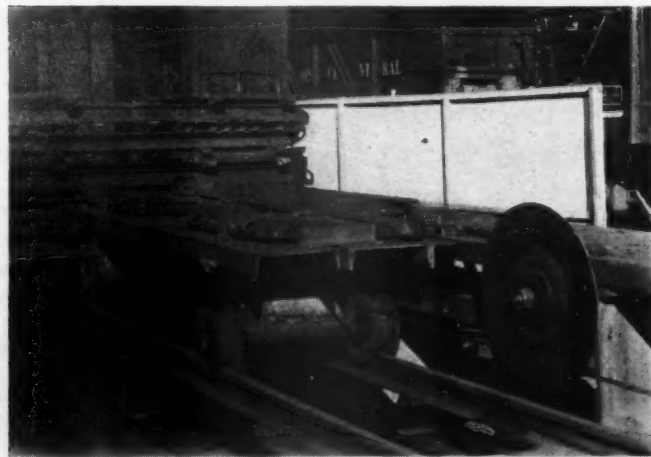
Another view of the machine showing details of the door carriage and cut-off saw
